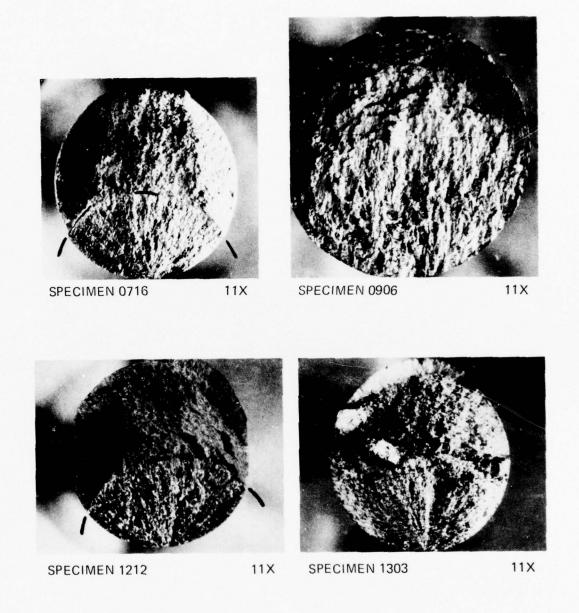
Fatigue-Fracture Surface and Origin of Failure for Specimens 0716, 0906, 1212, and 1303.
